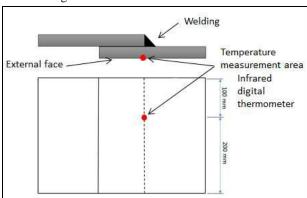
Temperature measurement. Side view and bottom view of plates with overlapping joints.
